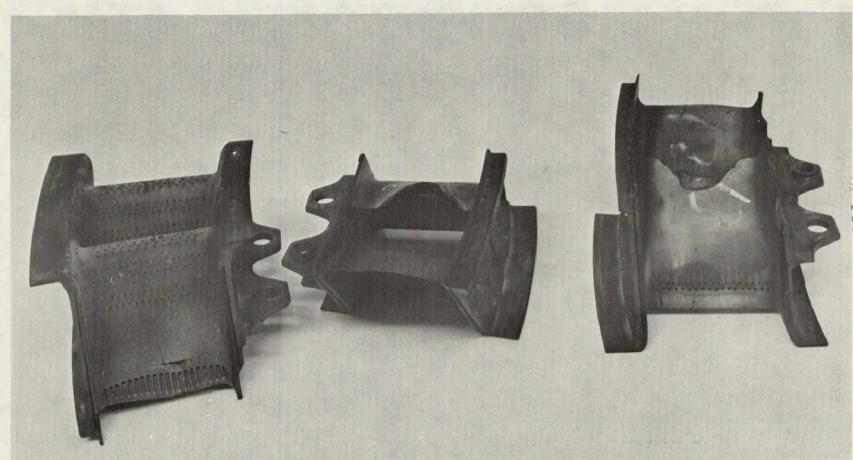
Stage 1 HP Turbine Nozzle Assembly Distress, Aft End.
